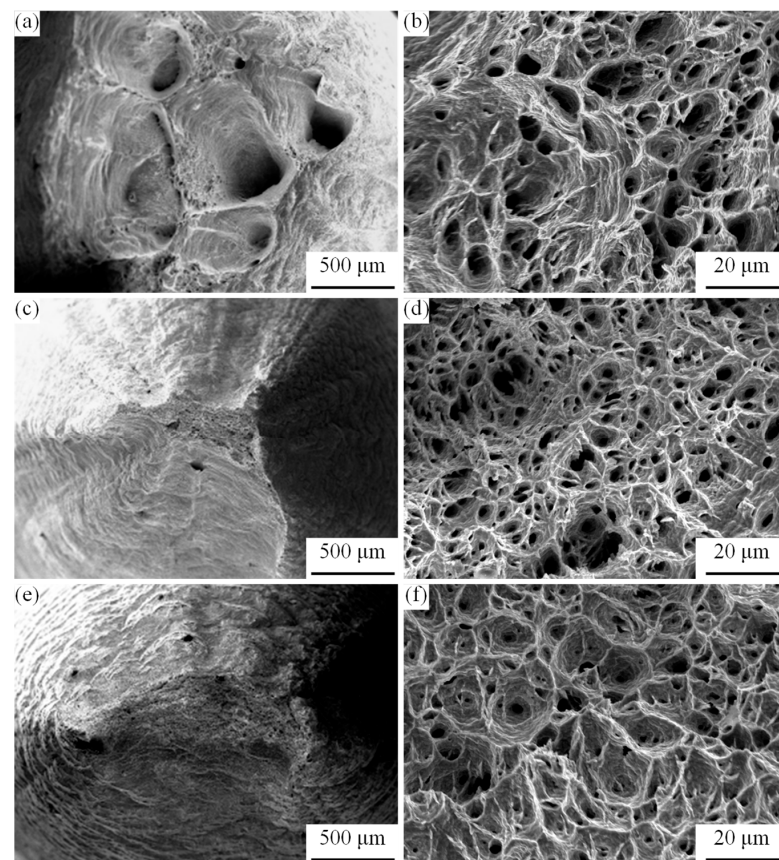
SEM images of the tensile fracture surfaces of the alloys at 750 °C: (a,b) 0Zr-4O alloy; (c,d) 0Zr-6O alloy; (e,f) 0Zr-10O alloy. (a,c,e) The entire fracture surfaces; (b,d,f) the enlarged images of fracture surfaces.
